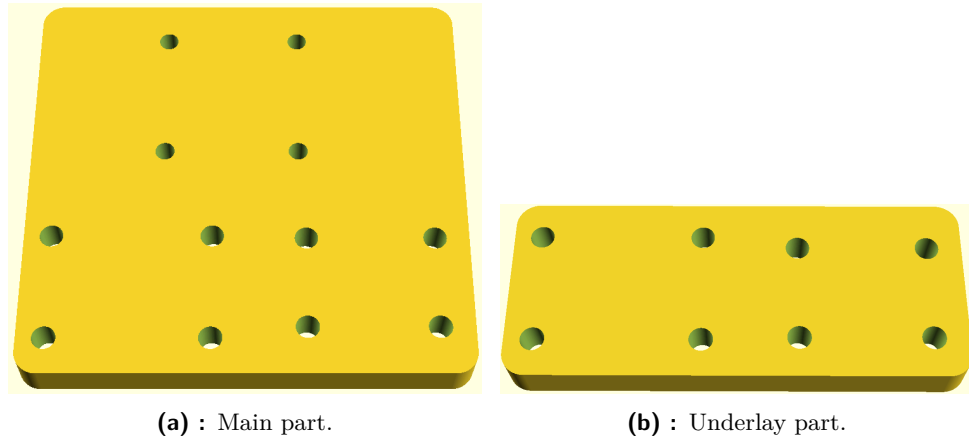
The intermediate part connecting Z-axis to Fi-axis.
